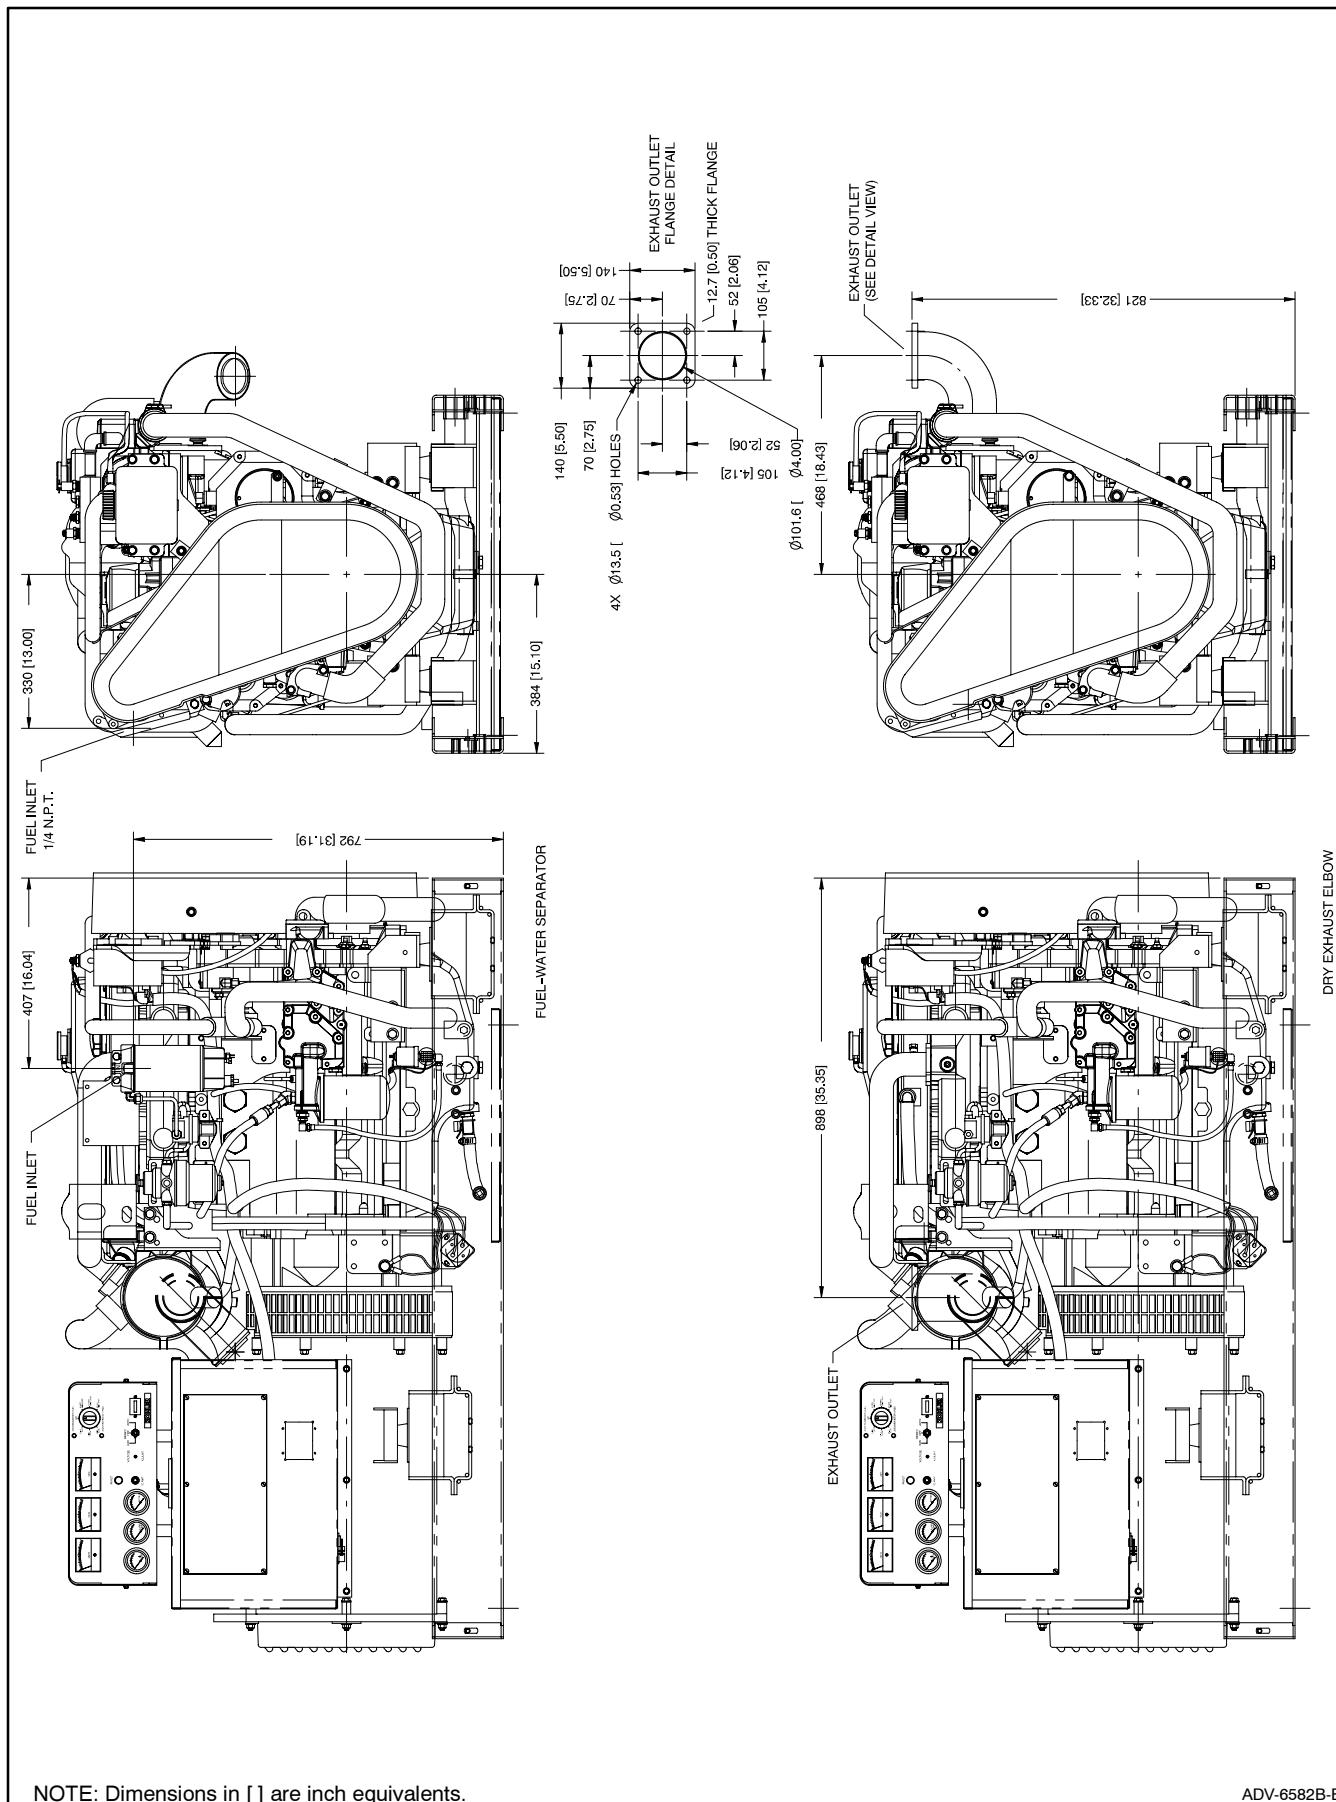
Dimension Drawing, 40EFOZ/50EOZ with Fuel/Water Separator and Dry Exhaust Elbow
